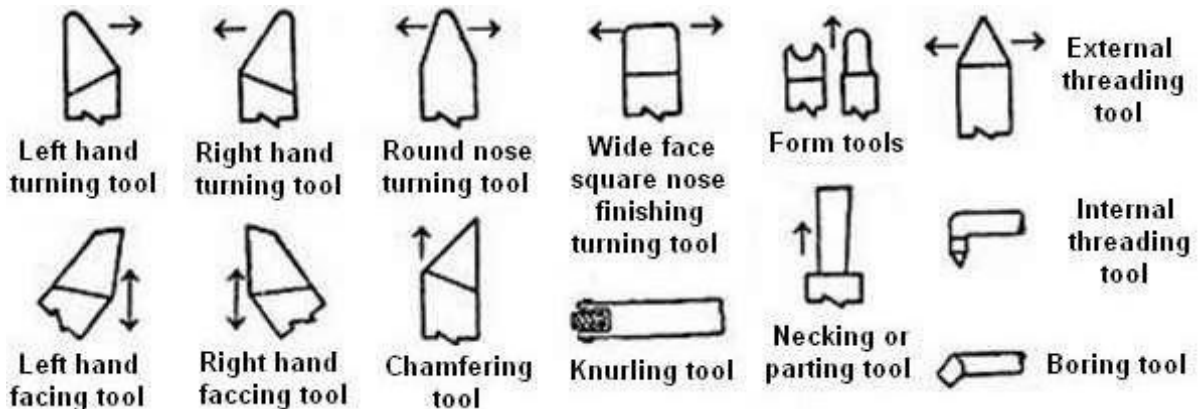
Various tools used in centre lathe according to the method of using the tool
